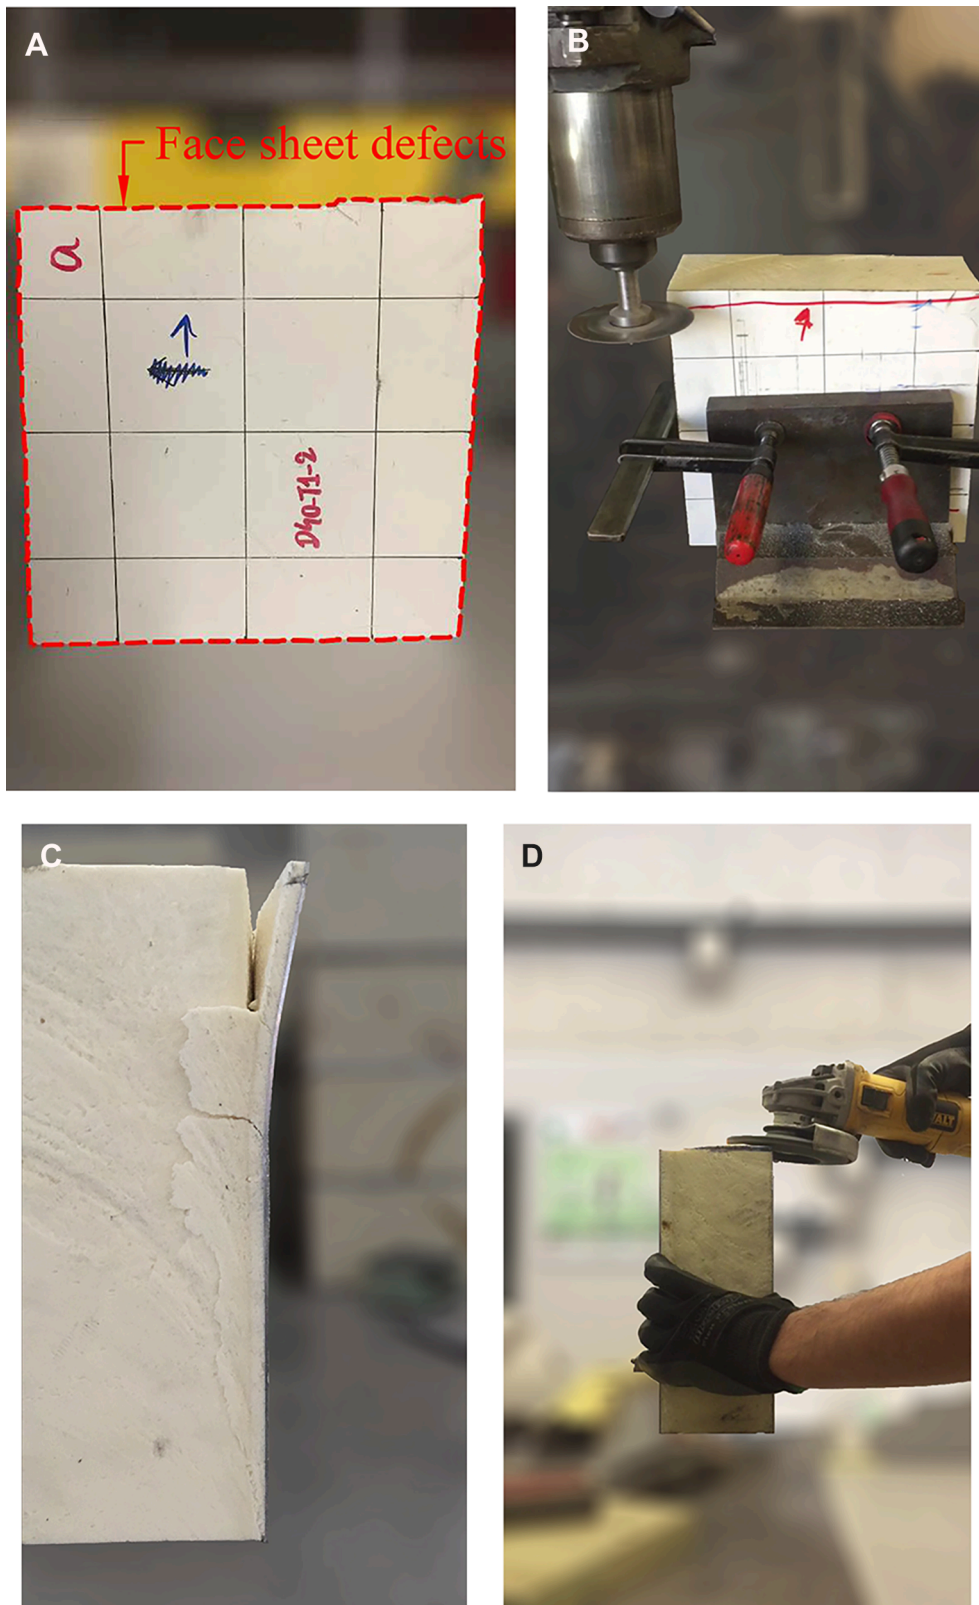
Sandwich panels specimens upon delivery: (a) face sheet defects; (b) milling machine treatment; (c) cohesive crack due to milling operation; (d) grinding wheel treatment.
